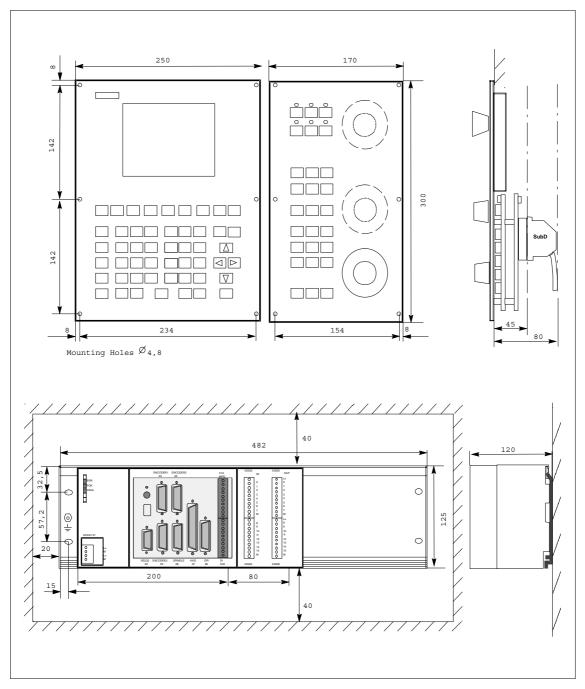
Mounting dimensions for SINUMERIK 802C
